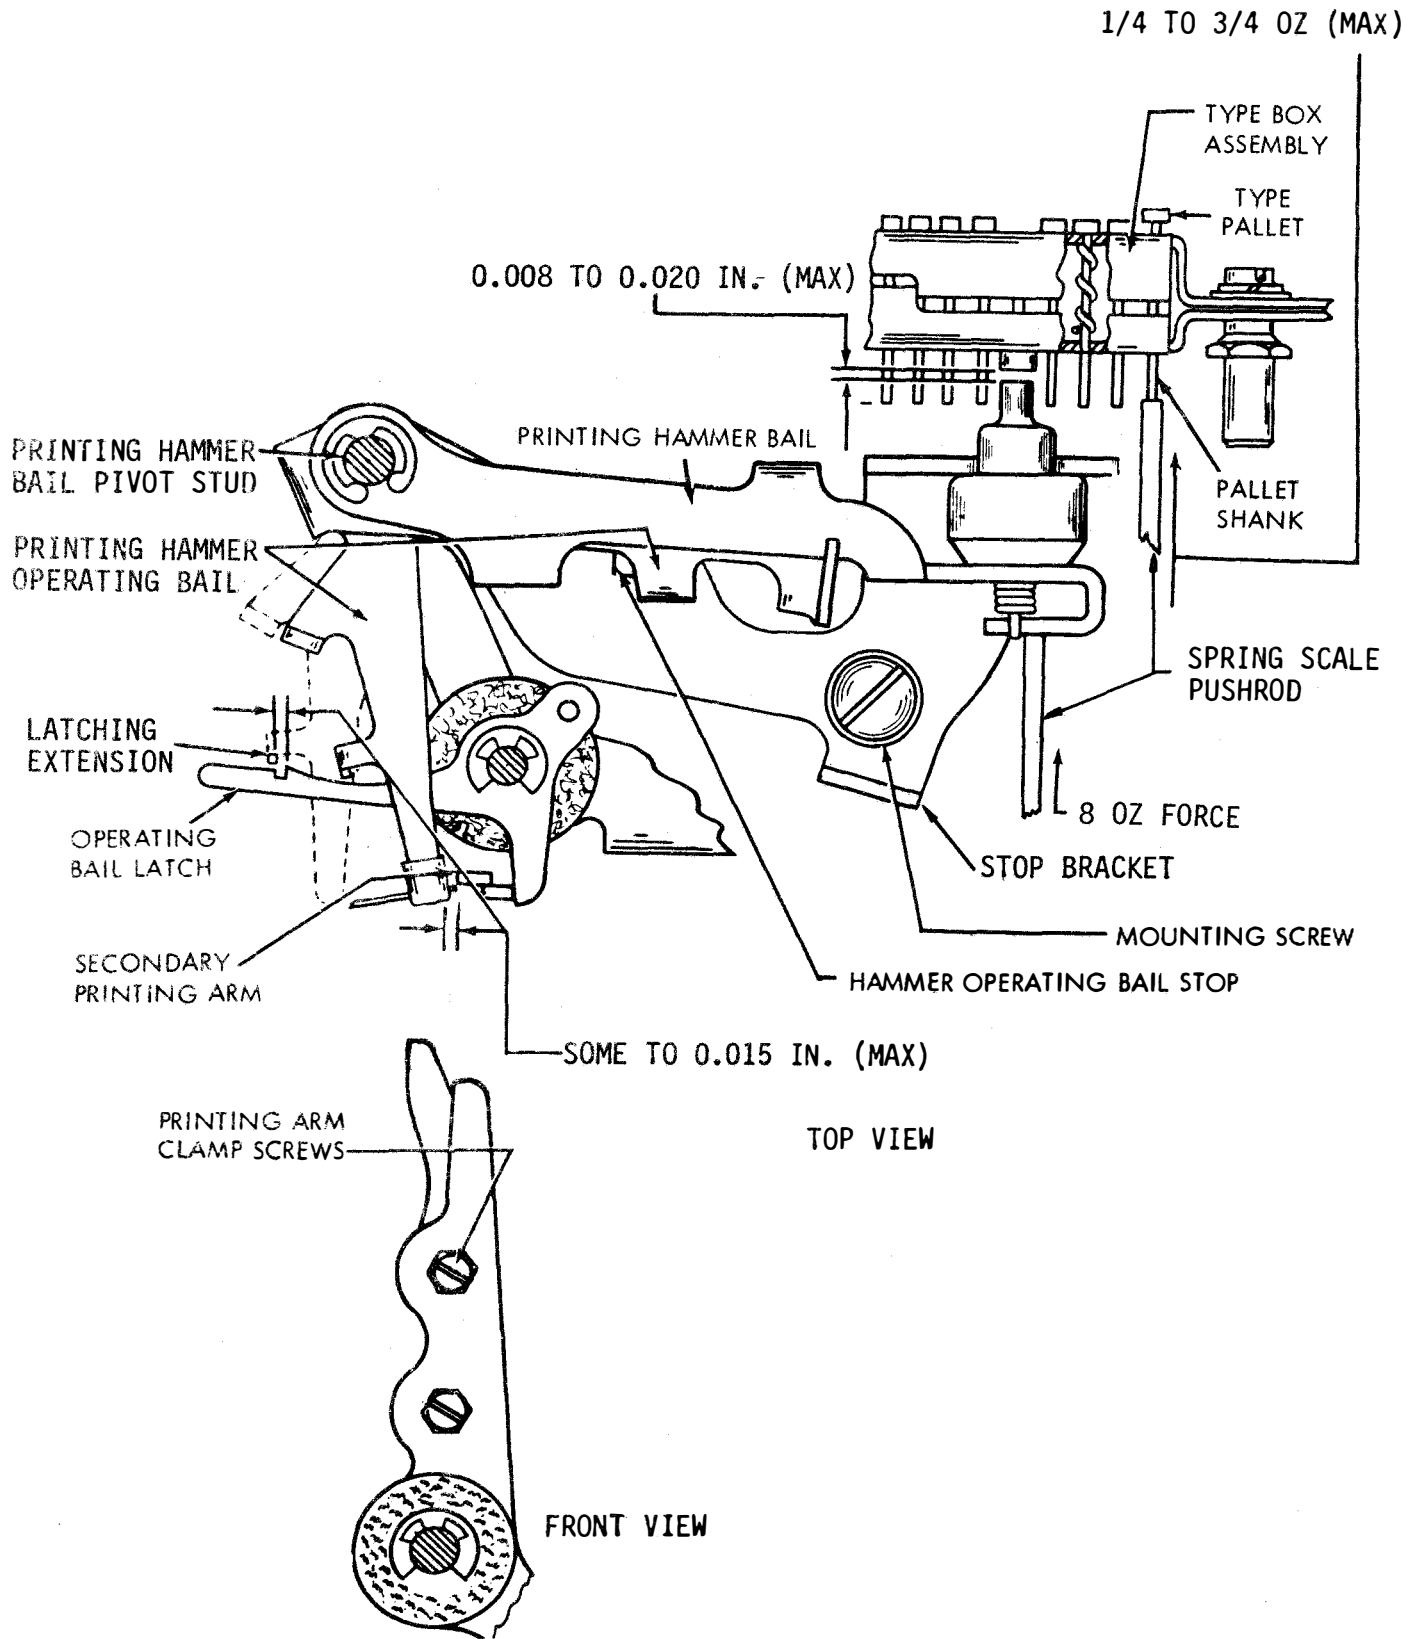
Printing Hammer Stop Bracket, Printing Arm, and Type Pallet Spring
